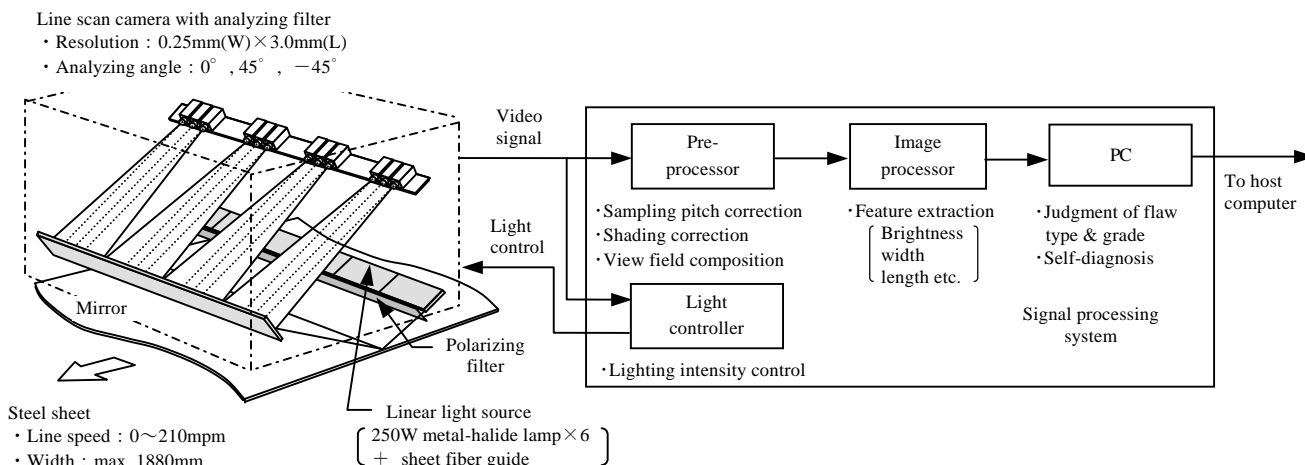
Schematic diagram of the surface flaw inspection system
